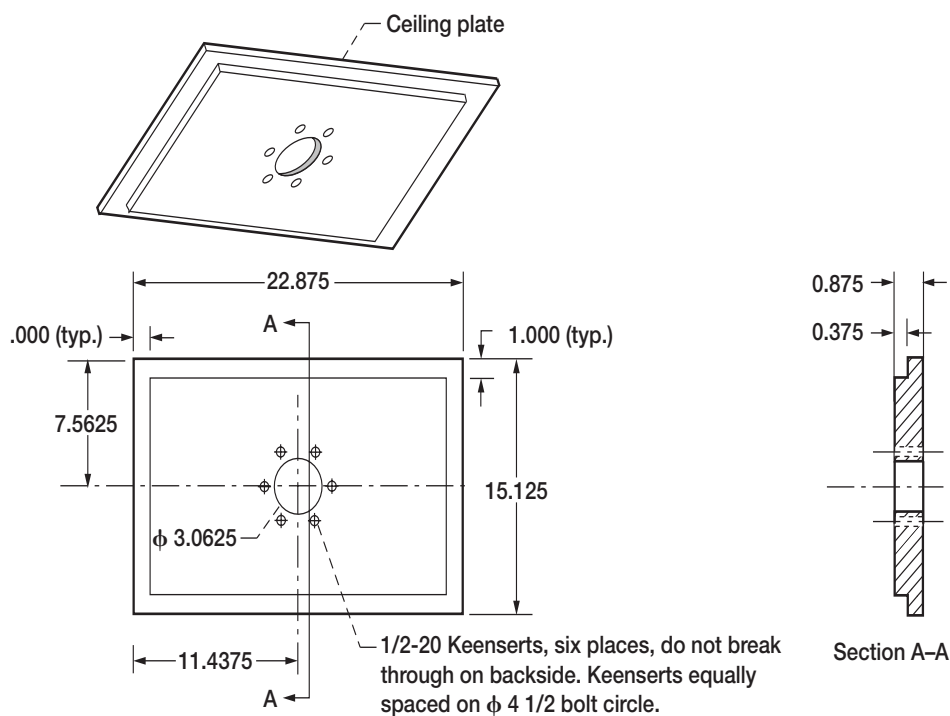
Ceiling plate for mounting model support pivot pins and bushings. Ceiling plate material is 6061-T6 aluminum. Standard tolerances are ± 0.010 in. All dimensions are in inches; typ. is typical.
